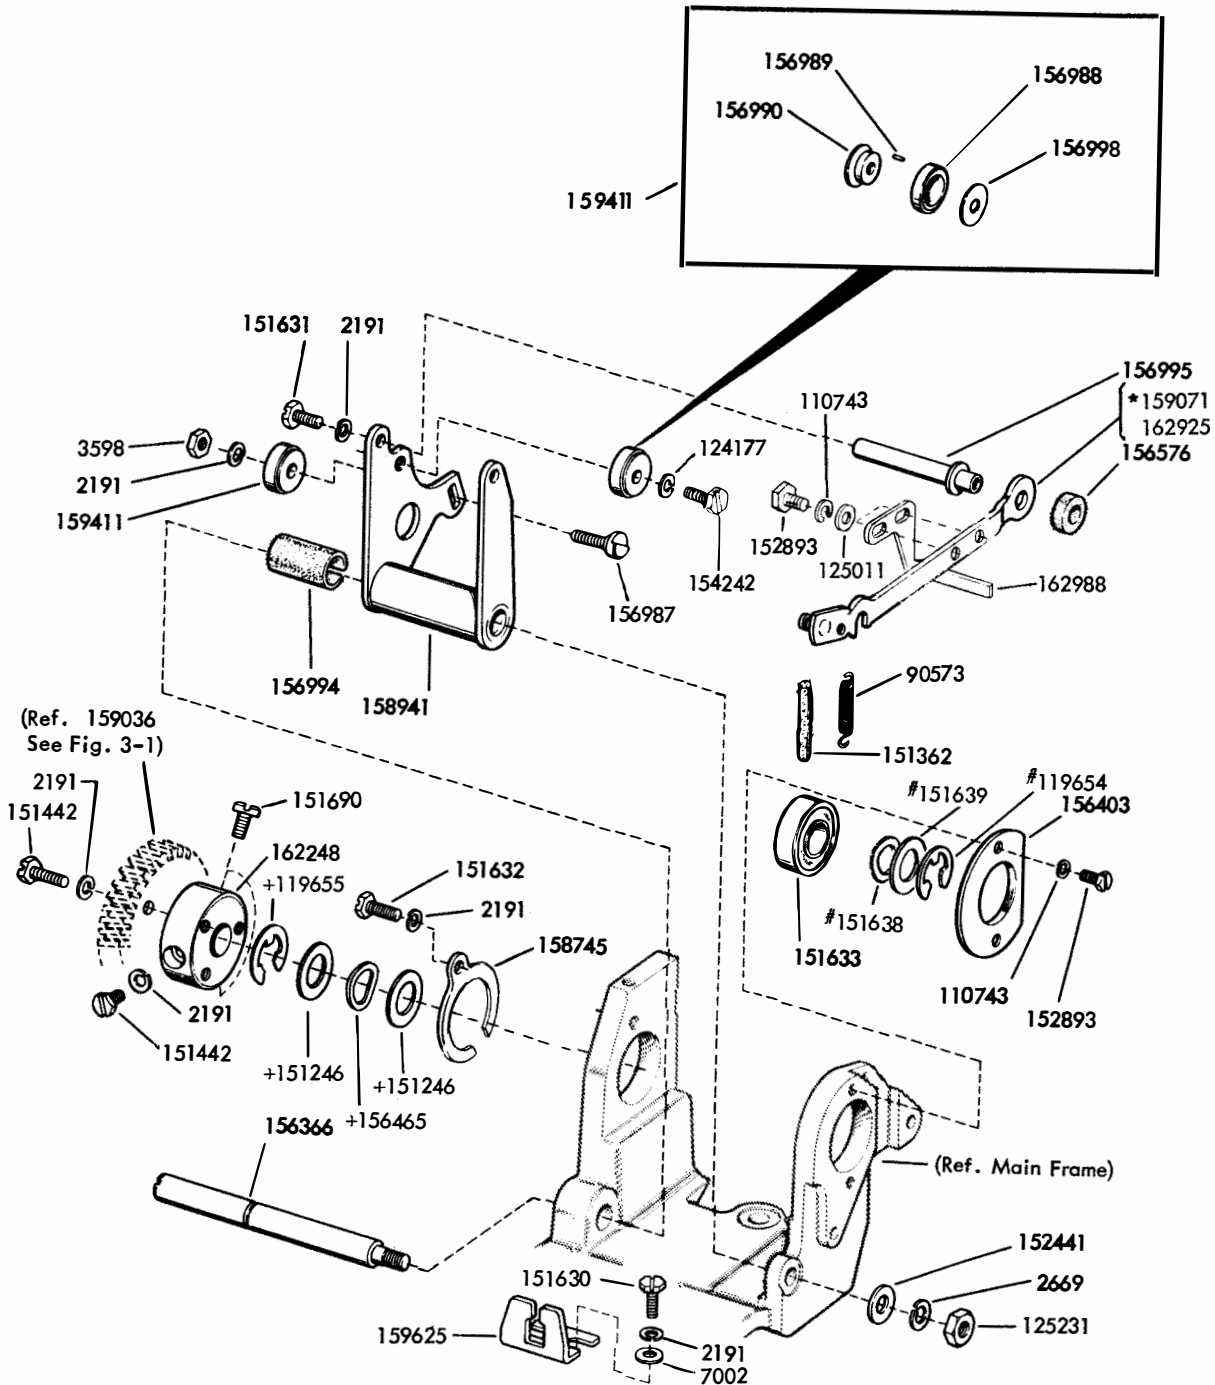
CODE SELECTOR ASSEMBLY
